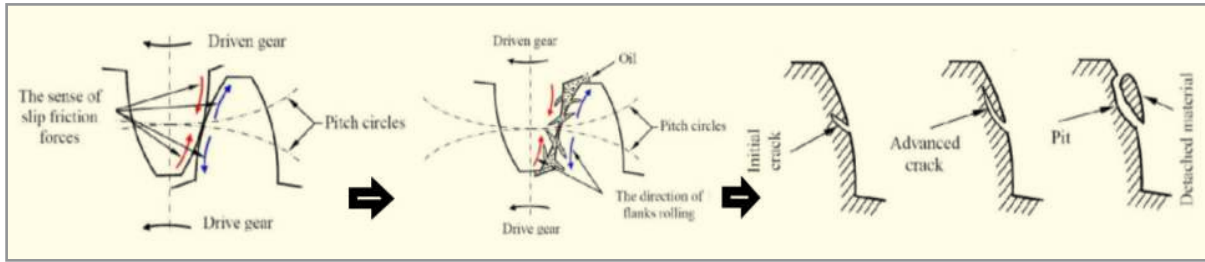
Mechanism of initiation of pitting on gear flank (4)
